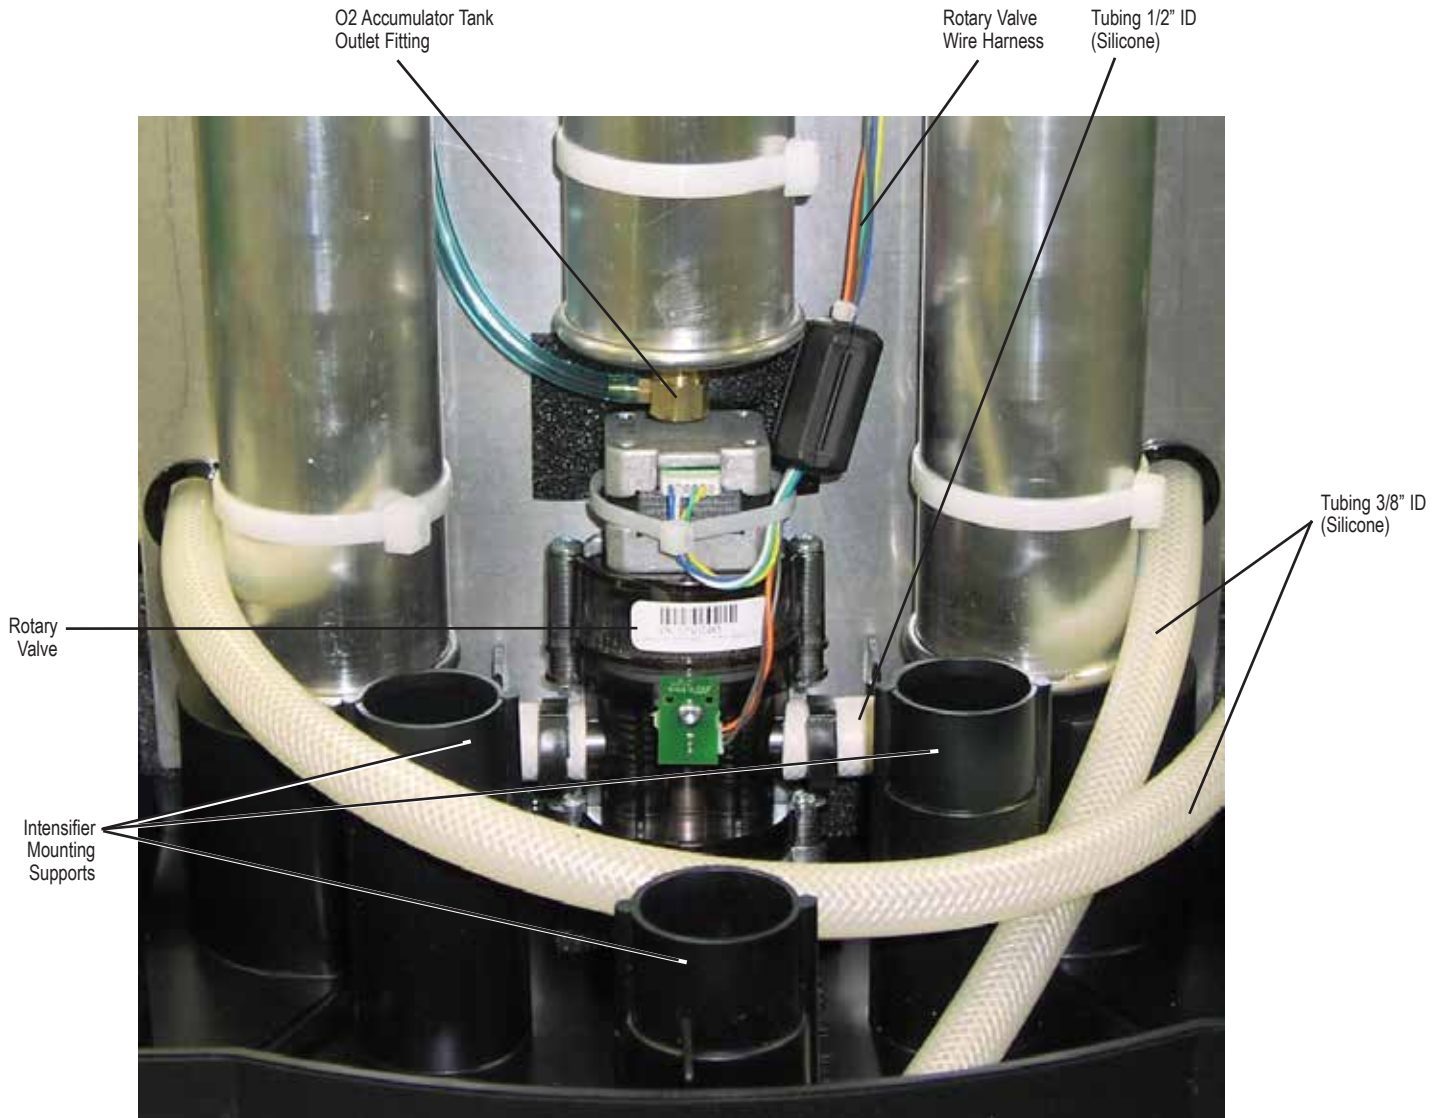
INTERIOR, INSIDE VIEW OF RIGHT COVER
